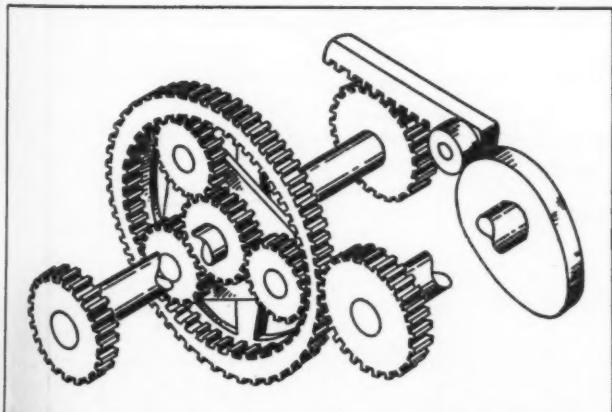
Perspective view of internal planetary gear system with rack and cam control mechanism
